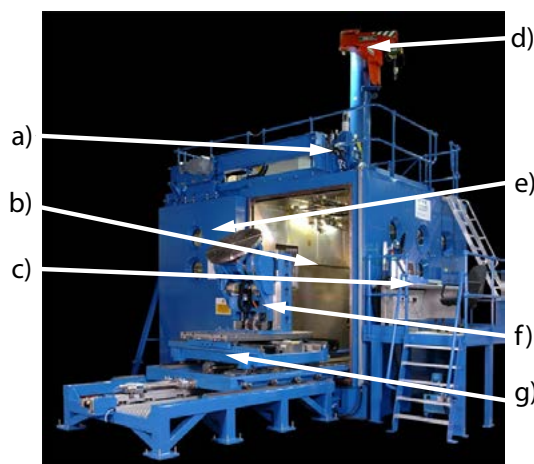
Example of complete electron beam welding station, a) electron gun, b) vacuum working chamber, c) control system, d) manipulator, e) working chamber sliding door, f) welding positioner, g) CNC table
